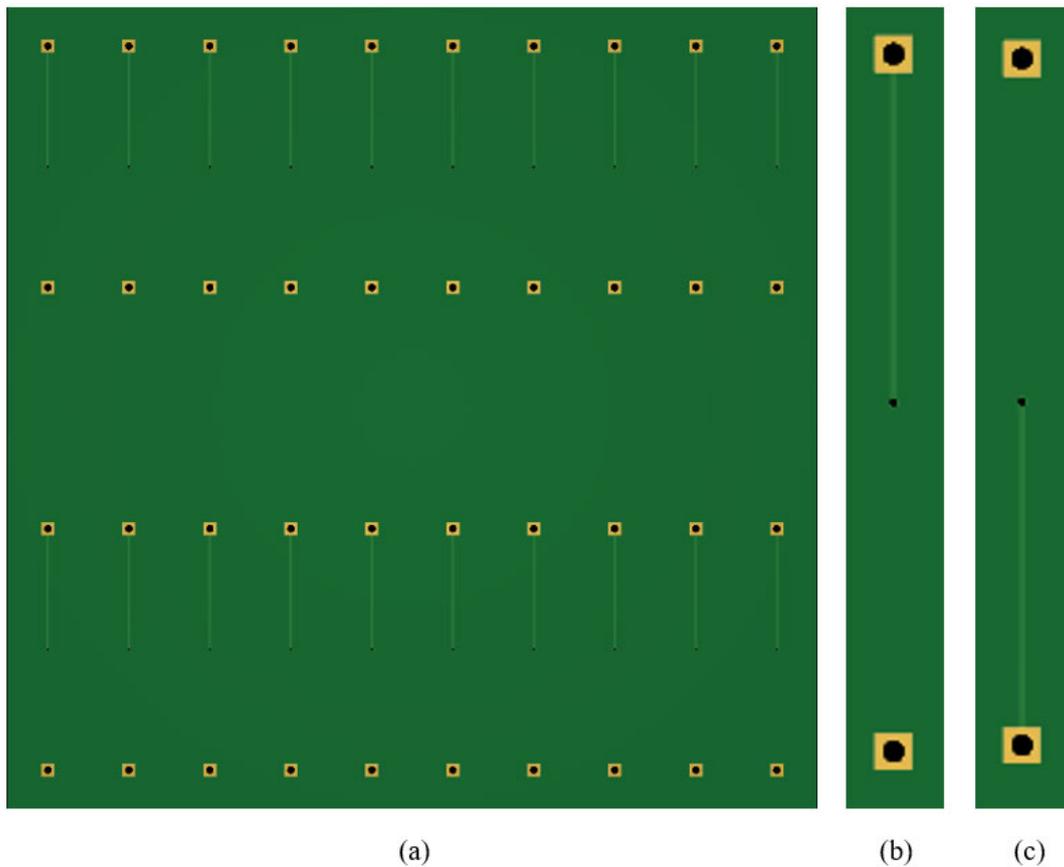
PCB Design for experimentation with one via on a circuit, (a) the PCB with two rows of ten testing circuits, (b) the top layer view of a single circuit, (c) the bottom layer view of a single circuit.
